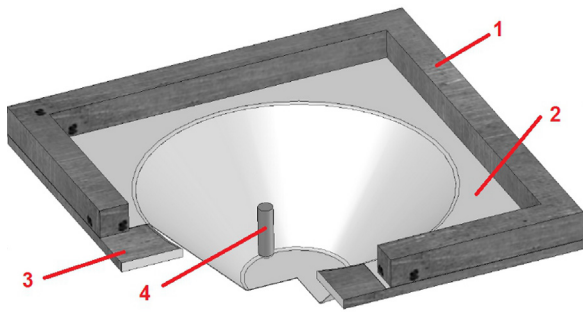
Illustration of SPIF in cross sectional view, with 1: clamping frame, 2: sheet, 3: faceplate, 4: forming tool.
